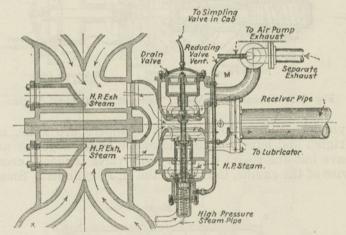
High Pressure Cylinder, "Simplex" Compound Engine. (Preferred Application.)
